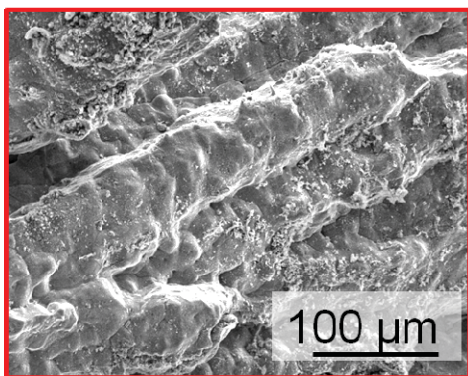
Observation of cracking weld on each constraint condition. (Using G69A3UMN4M3 filler wire)
